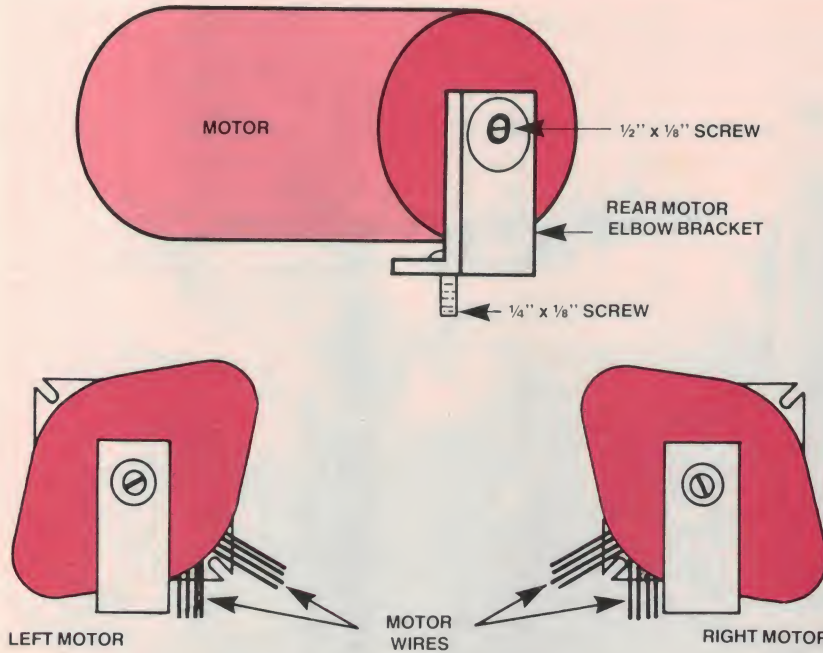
How the rear motor mount bracket is fixed to each motor. Note the different positions for the left and right motors.
